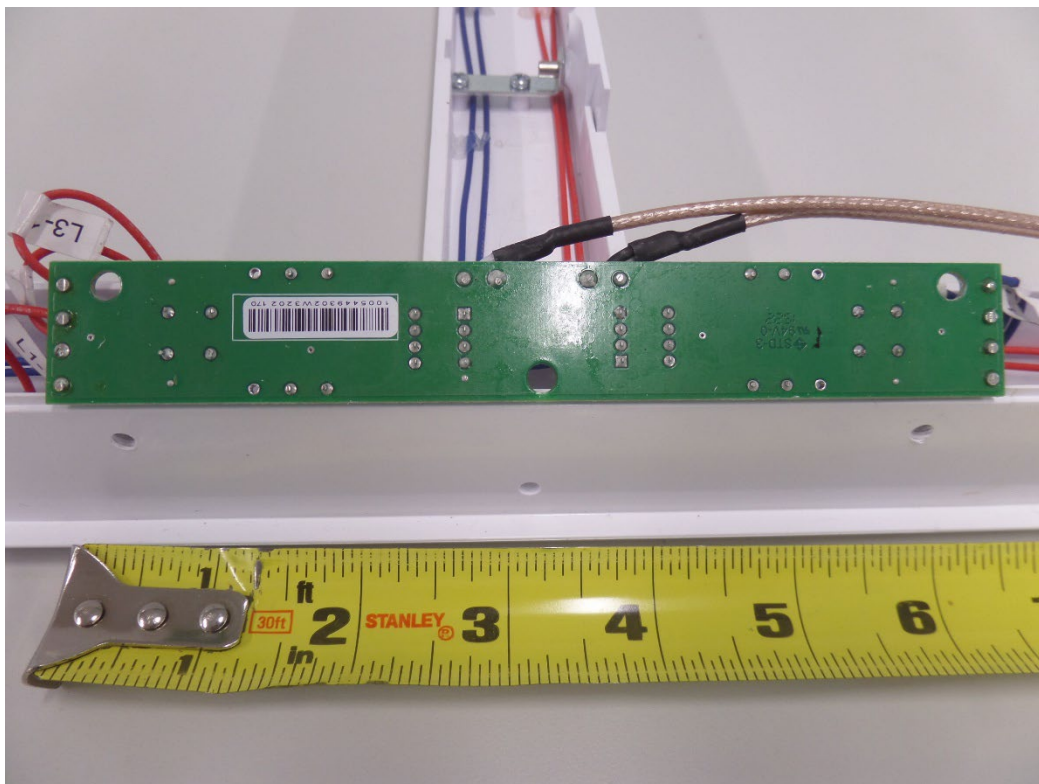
NG12 PRI/PAB RF PED MATCHING BOARD BOTTOM SIDE
